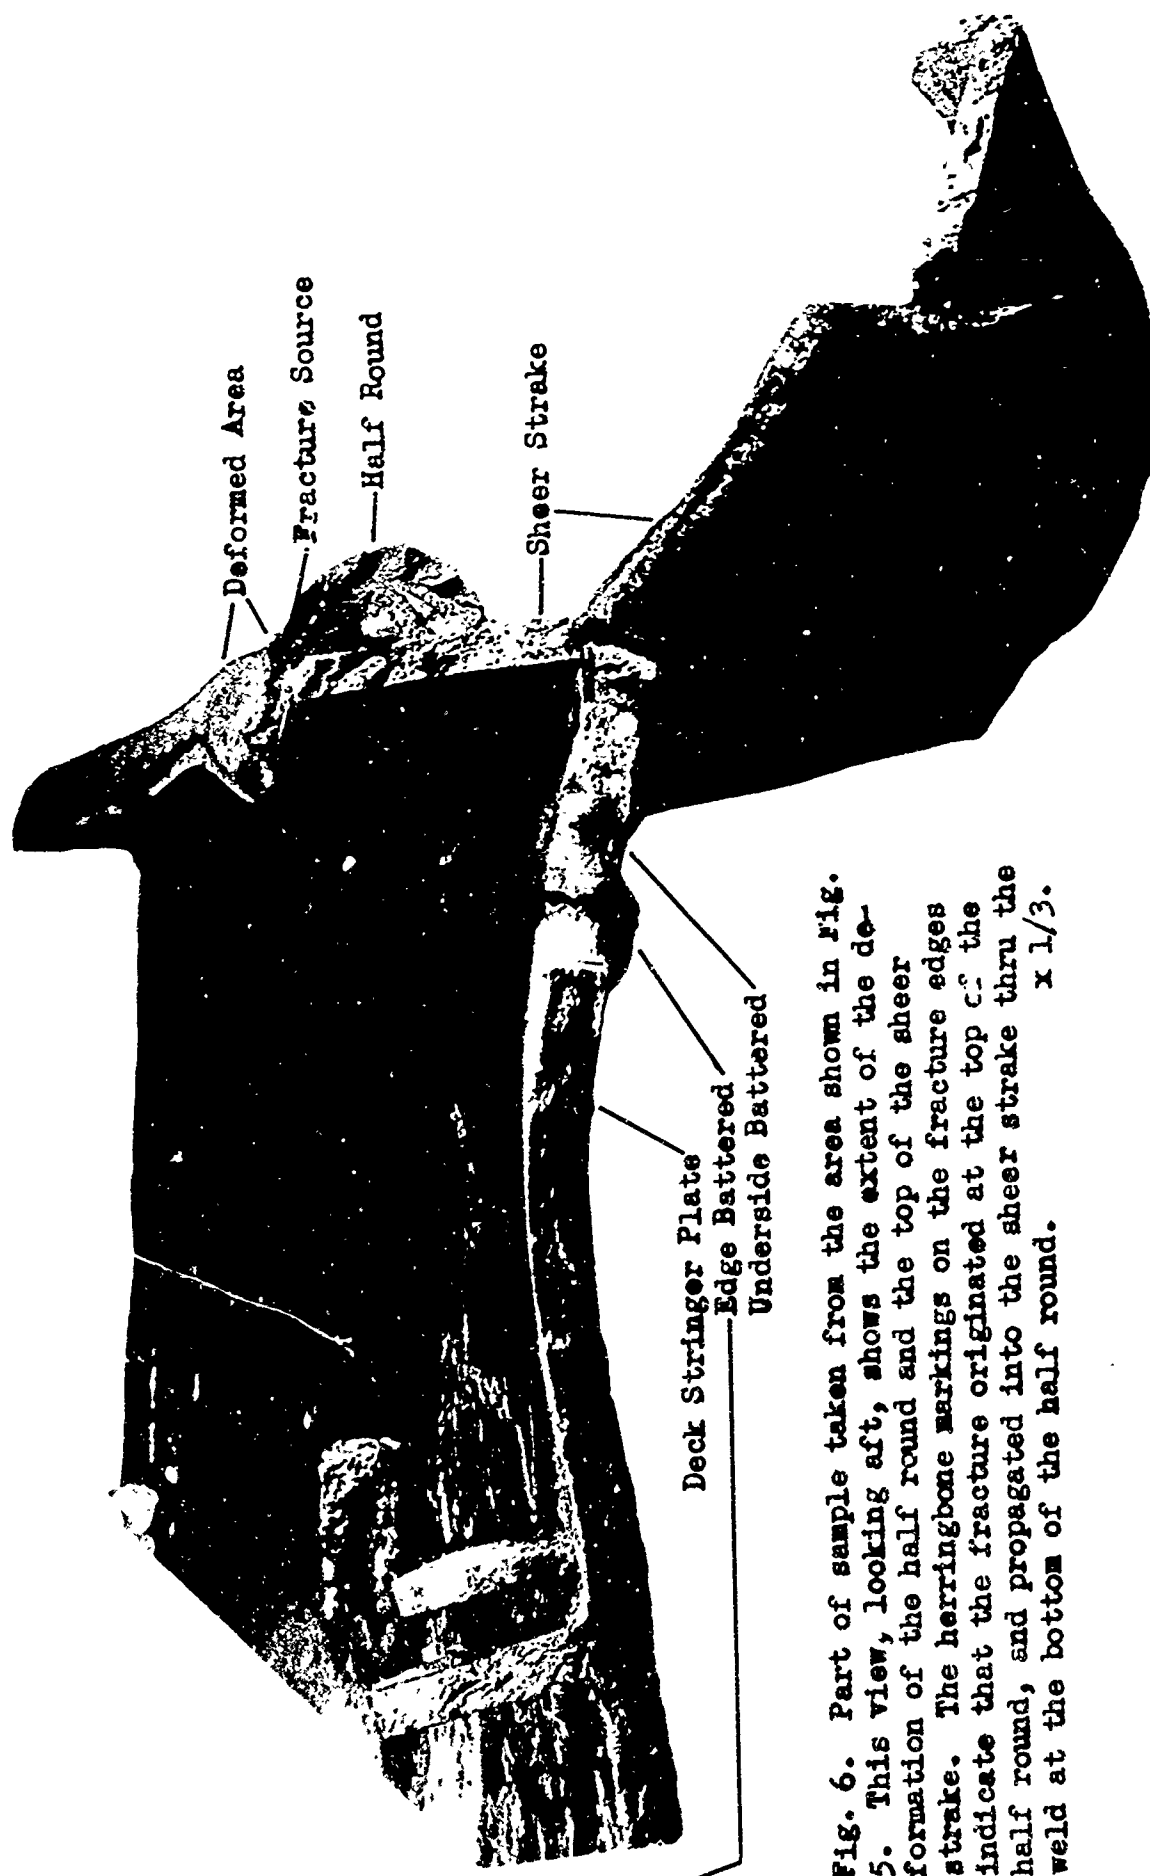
Part of sample taken from the area shown in Fig. 5. This view, looking aft, shows the extent of the deformation of the half round and the top of the shear strake. The herringbone markings on the fracture edges indicate that the fracture originated at the top of the half round, and propagated into the shear strake thru the weld at the bottom of the half round. x 1/3.
